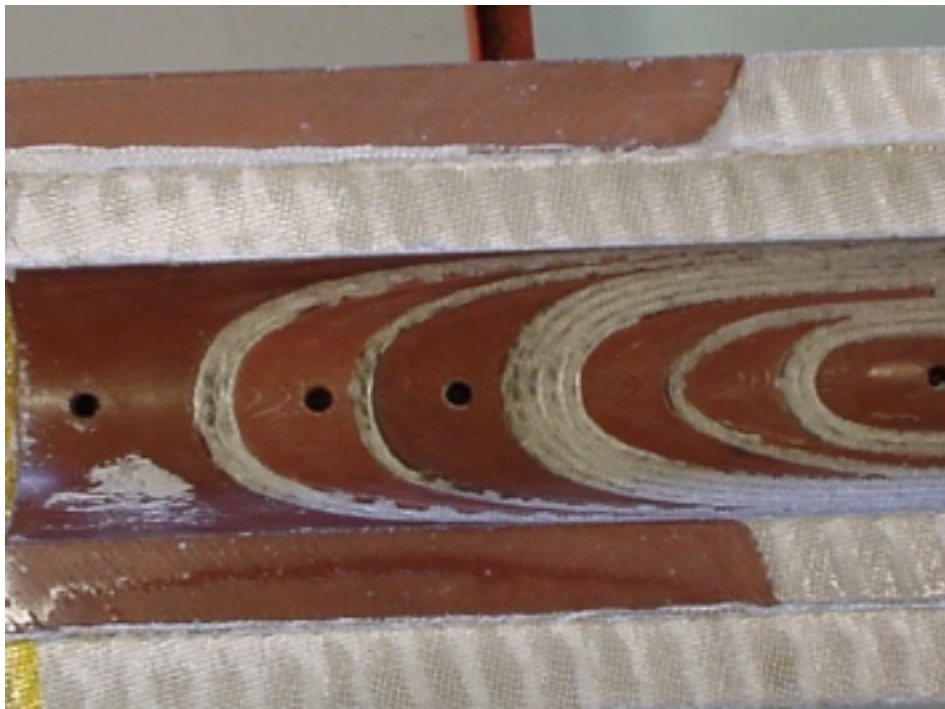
Cured Outer Coil, PC03 wound using Selective Laser Sintered End Parts.
